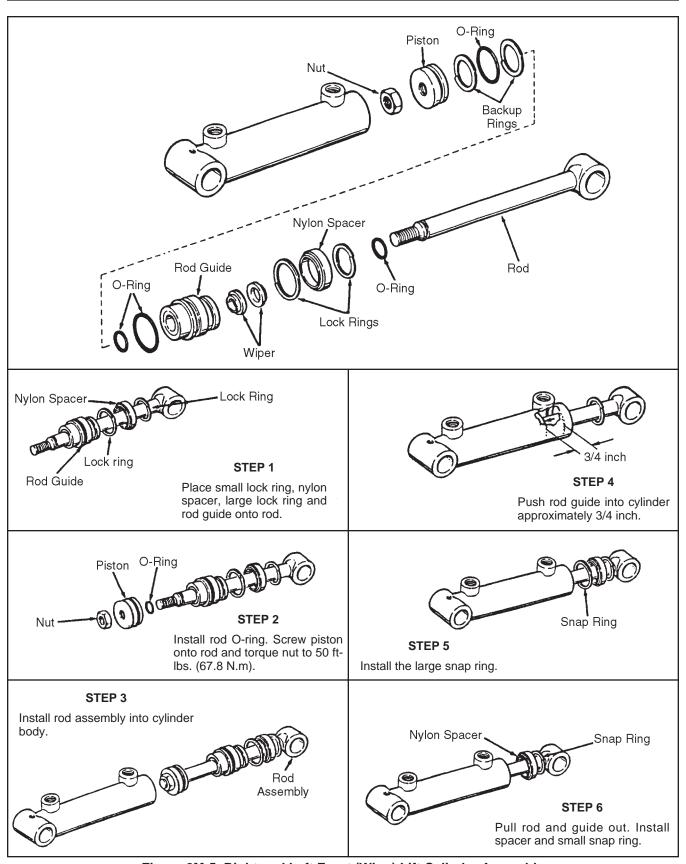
M-5. Right and Left Front (Wing) Lift Cylinder Assembly
